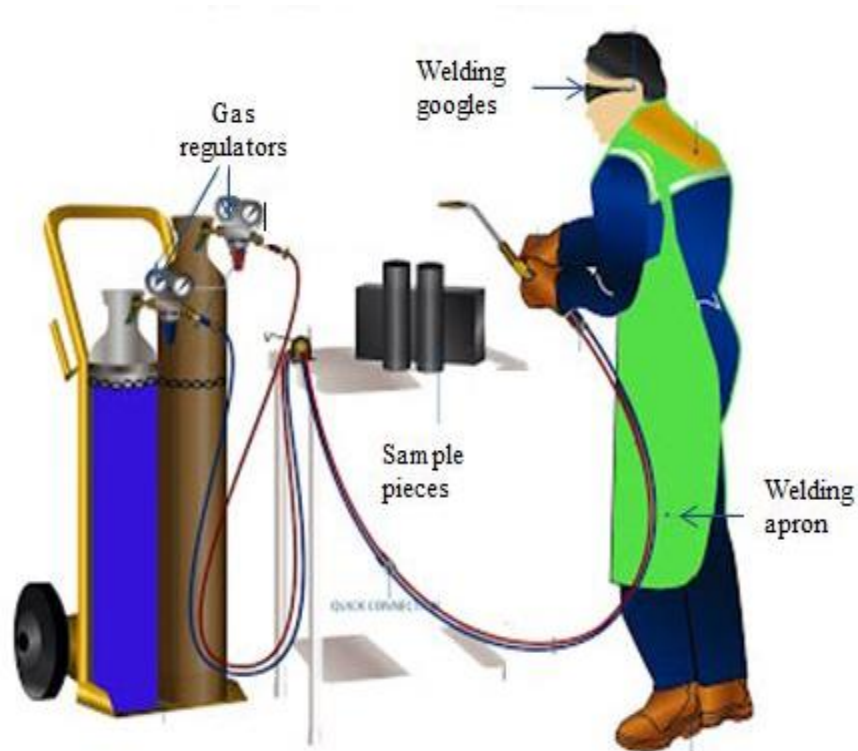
Schematic showing the oxyacetylene brazing process [84].
